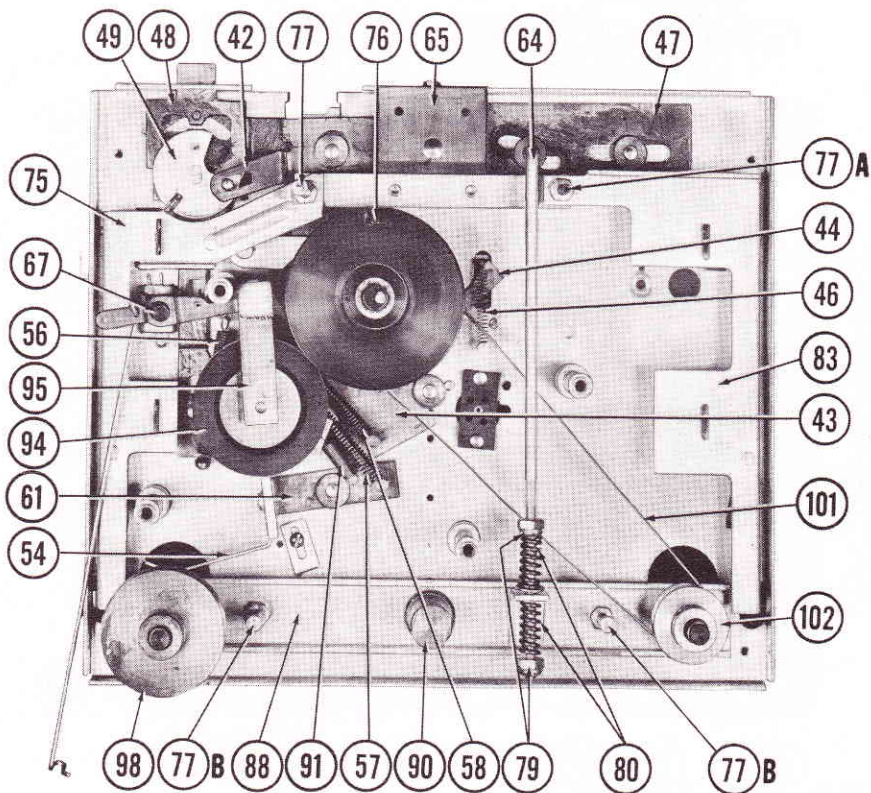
Bottom View Of NL-1 With Motor Mtg. Plate Removed.
